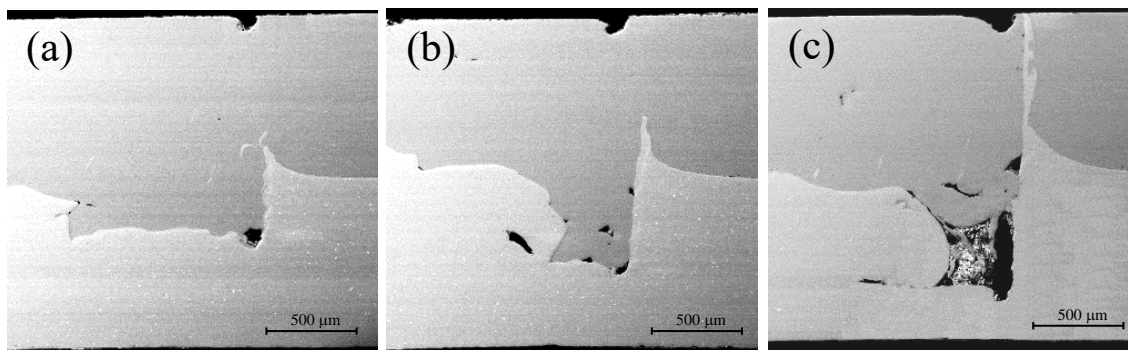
Backscattered SEM micrographs showing the development of weld defects (voids and hooks) at the edge of Mg and Al joints, as a function of the sleeve plunge depth. Welds were produced using the modified RFSSW process with welding condition of 2500 rpm, 1.0 s, and a plunge depth of (a) 1.2 mm, (b) 1.4 mm, and (c) 1.6 mm.
